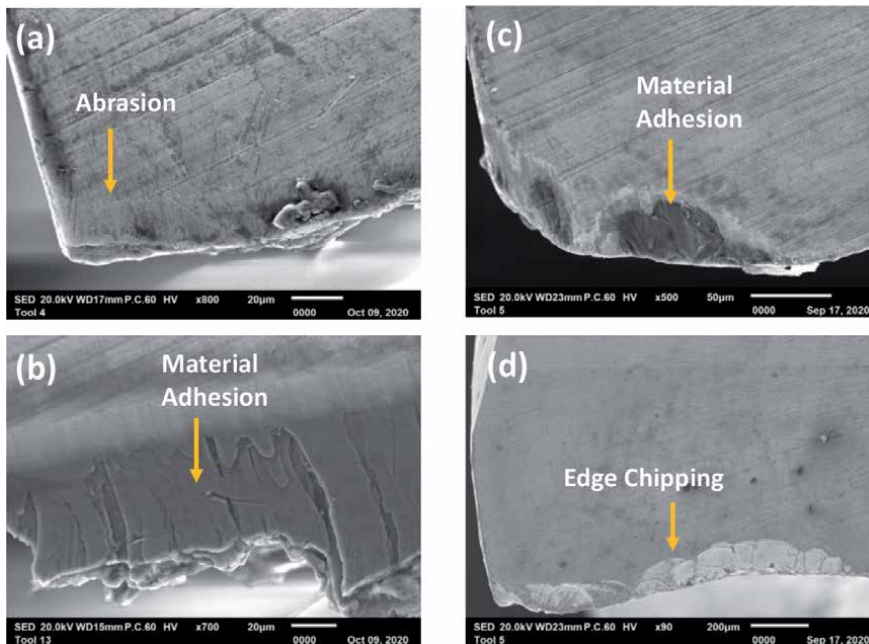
Tool wear mechanism when drilling Al 7075-T6 (a) abrasive wear, (b, c) adhesion of material, and (d) chipping at the cutting edge of carbide drills.
